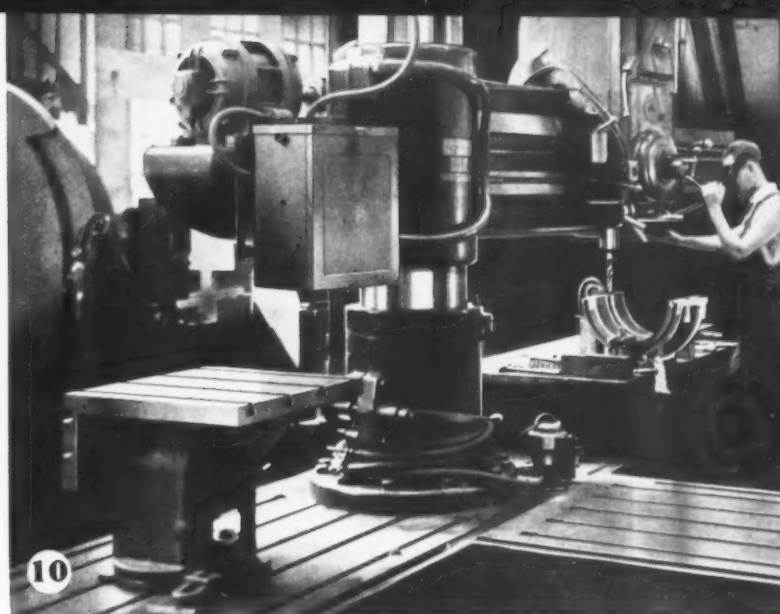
Radial Drilling Machine with Base Extending in Three Directions to Expedite Setting up Work
